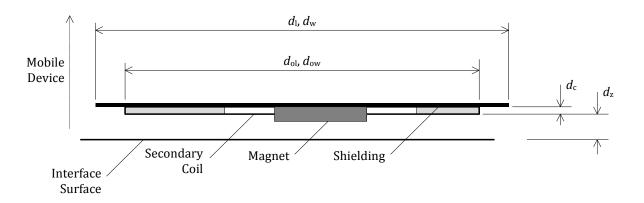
Secondary Coil and Shielding assembly of Power Receiver example 1
